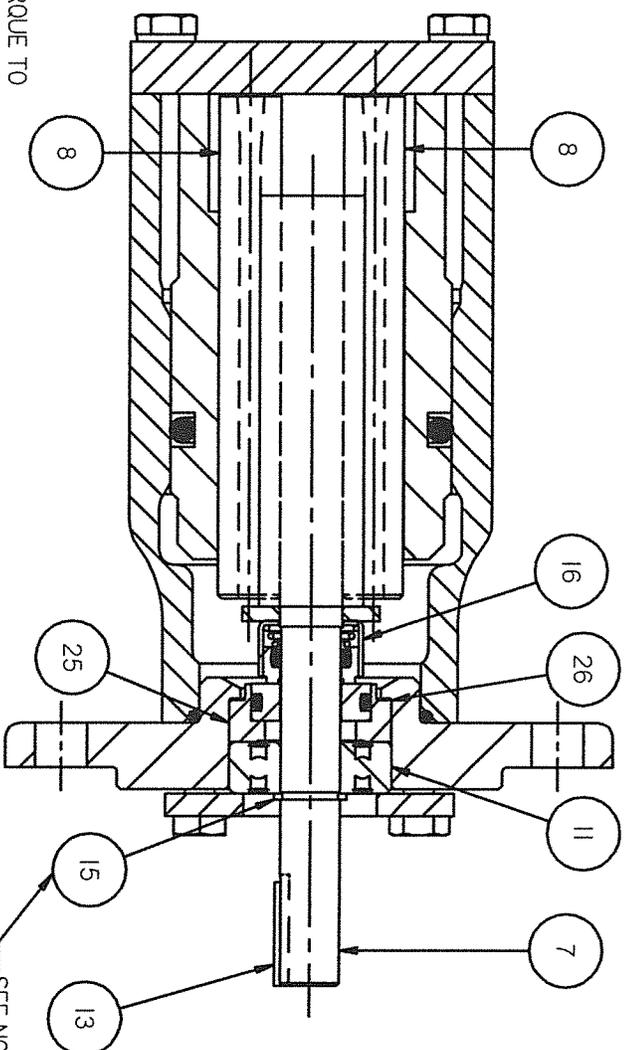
IRON CASE C-FACE ASSEMBLY
